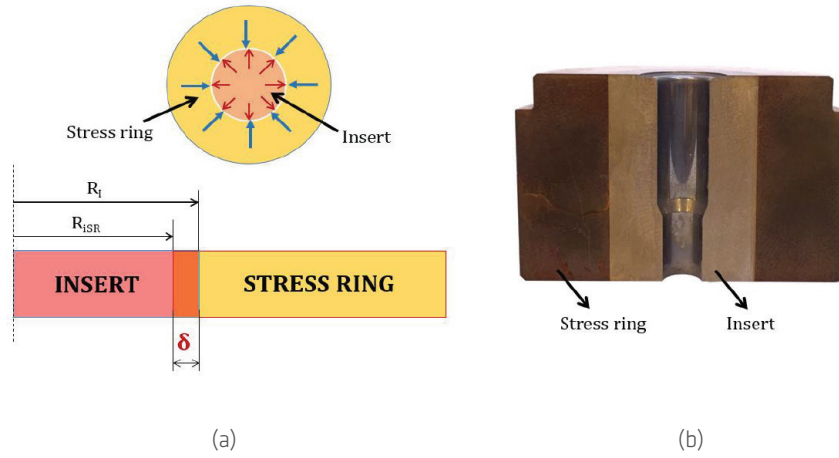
(a) Schematic representation and (b) cross-sectional picture of a cold forging die.
